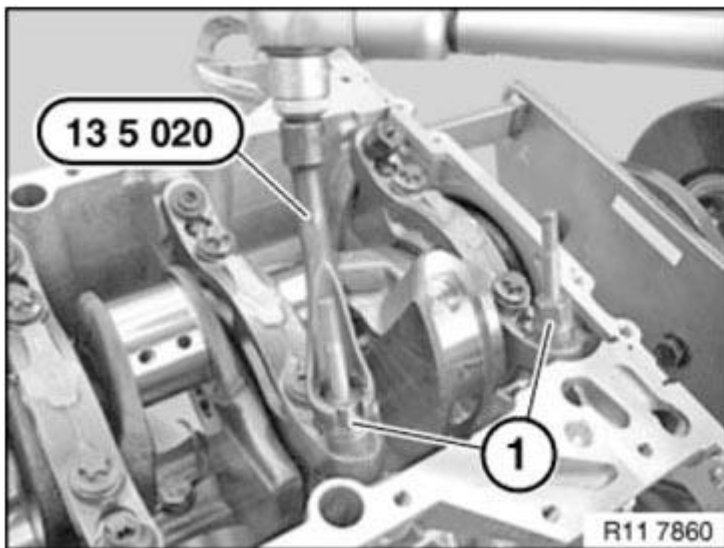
Removing Oil Pump Spacer Bolts With Special Tool 13 5 020
